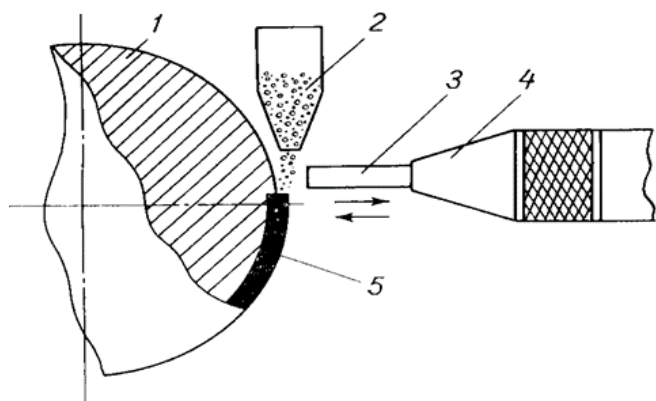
Scheme of deposition formation on the rotational surfaces of cylindrical workpieces: 1) workpiece (cathode); 2) powder feeder; 3) anode; 4) vibrator; 5) alloyed layer
